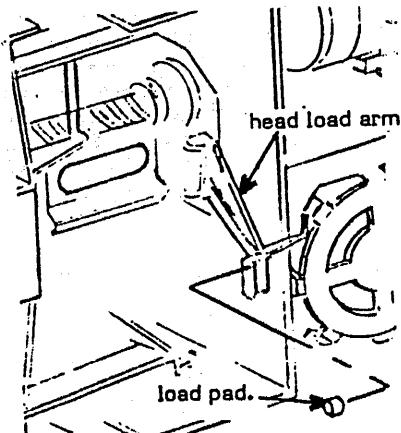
HEAD LOAD PAD REPLACEMENT
